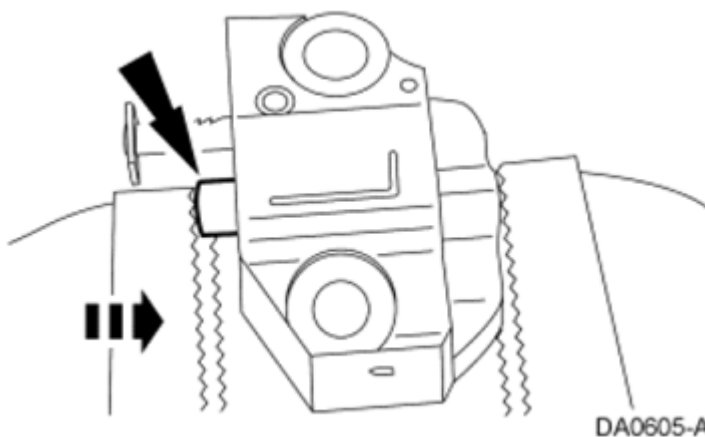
Compressing Each Tensioner Plunger Using Vise
